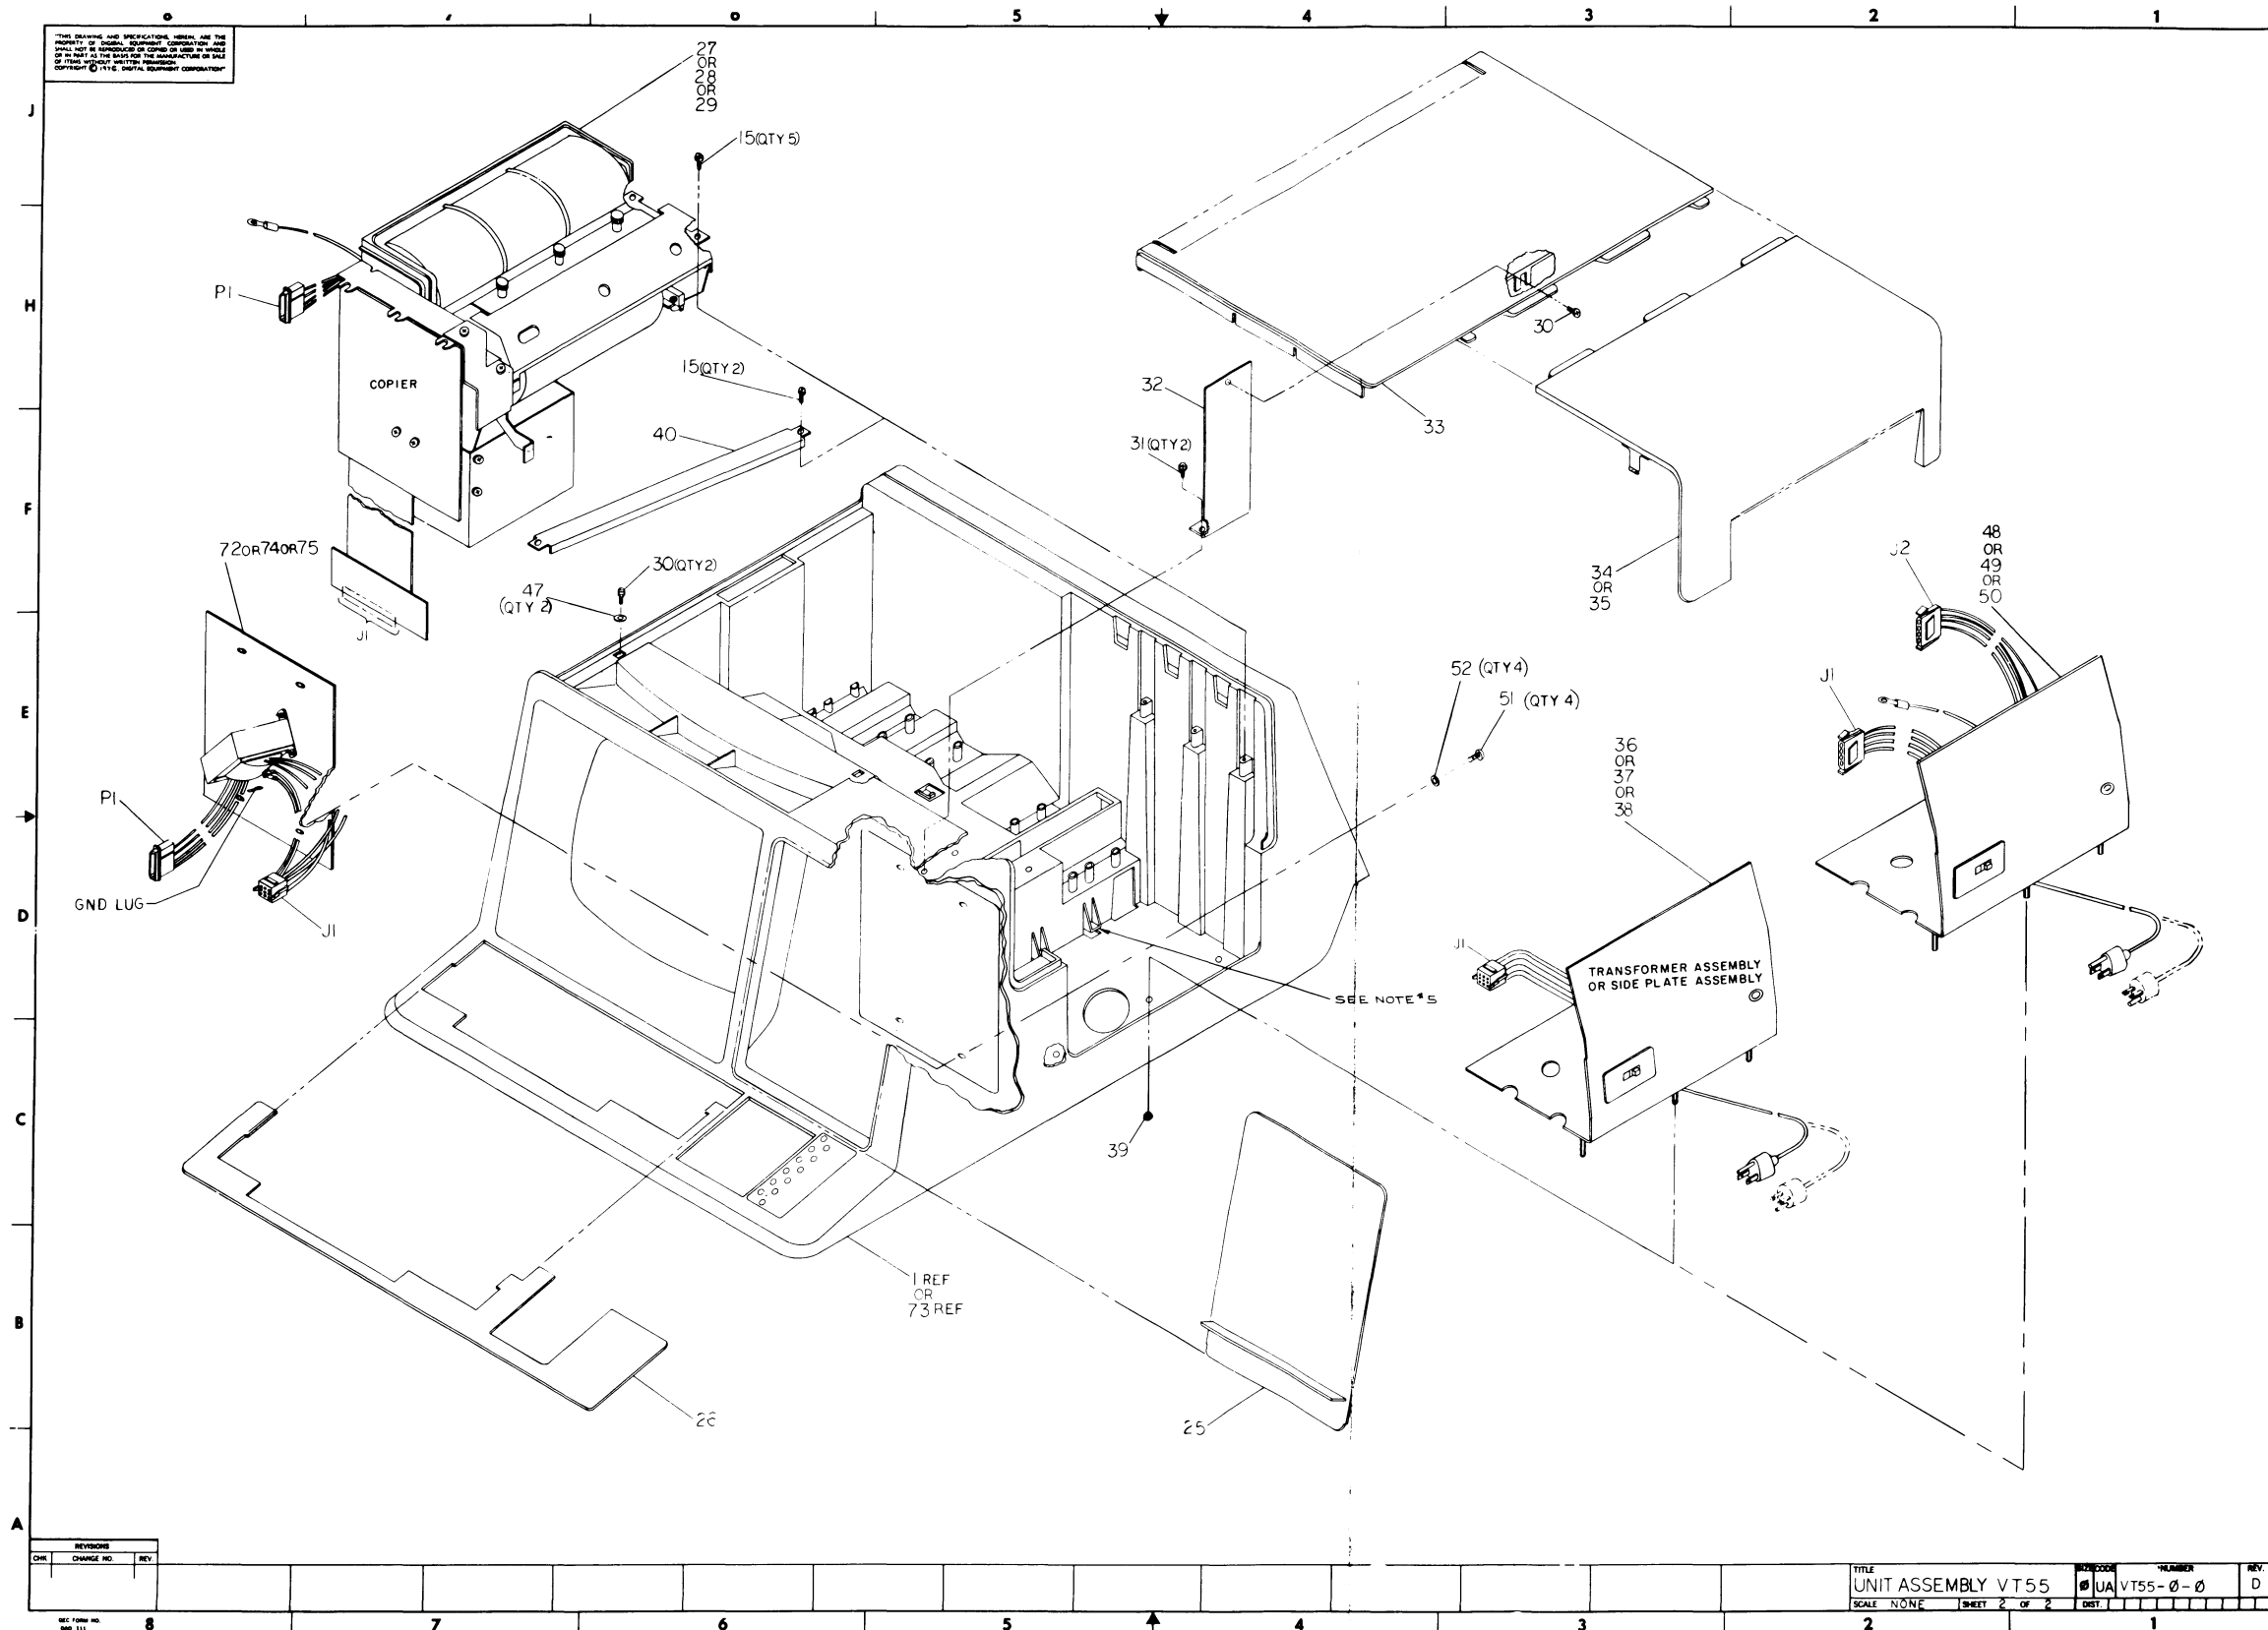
VT55 DECscope Assembly Drawing (Sheet 2 of 4)
